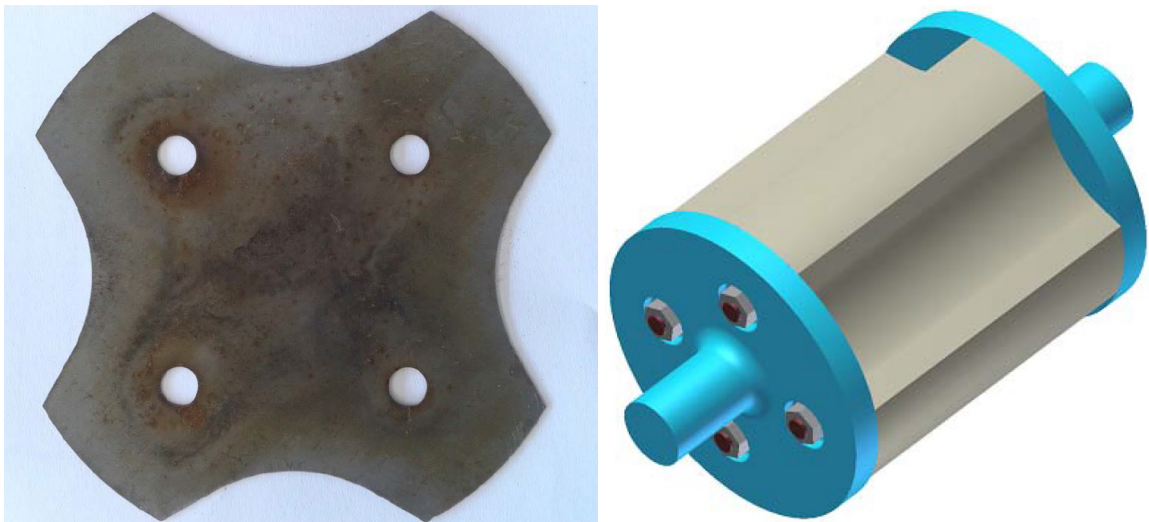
High speed rotor lamination with no shaft bore (left) and rotor assembly with end plates (right) [38]
